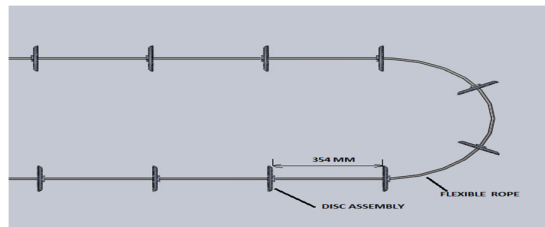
Conveyor medium which need to be move by flat disc type transmission
